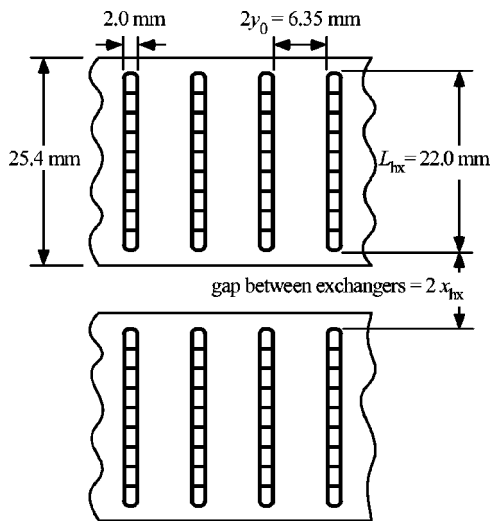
Cross-sectional drawing of a portion of the two heat exchangers, with dimensions. The portion shown includes, for each exchanger, four of the hollow tubes that are the “plates” of the parallel plate heat exchangers.
